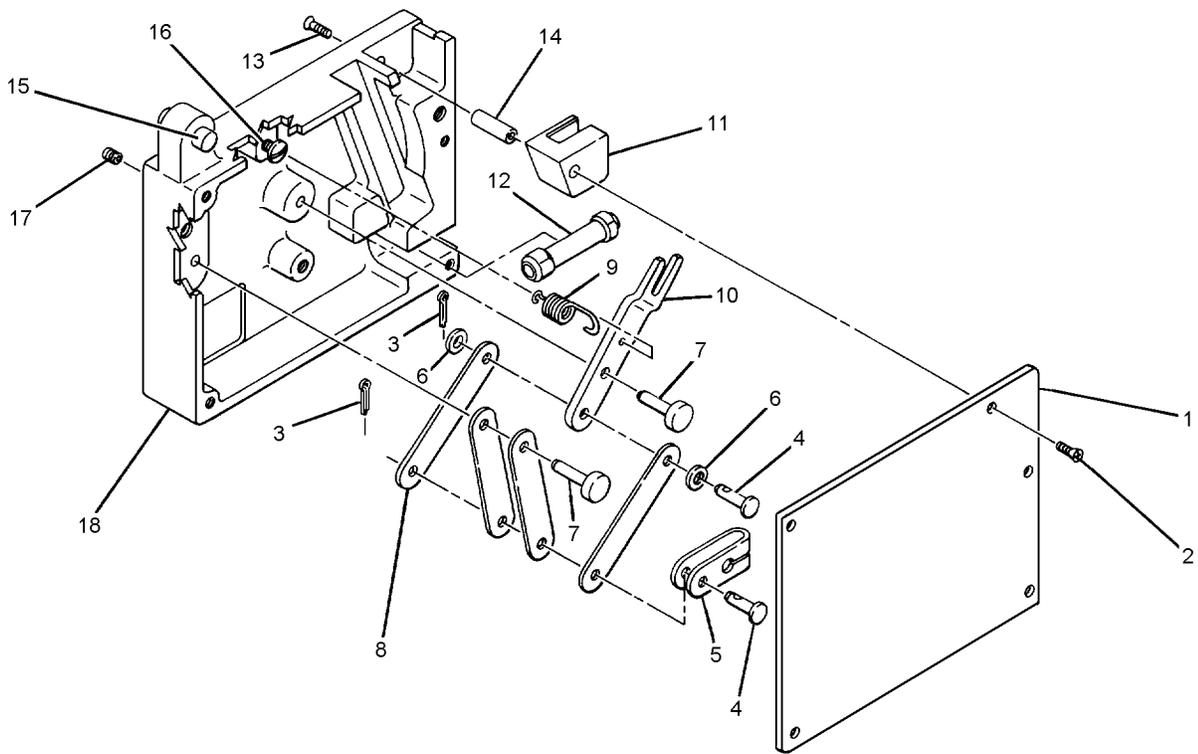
Lid Lock Release Assembly (RSSK-8E)
